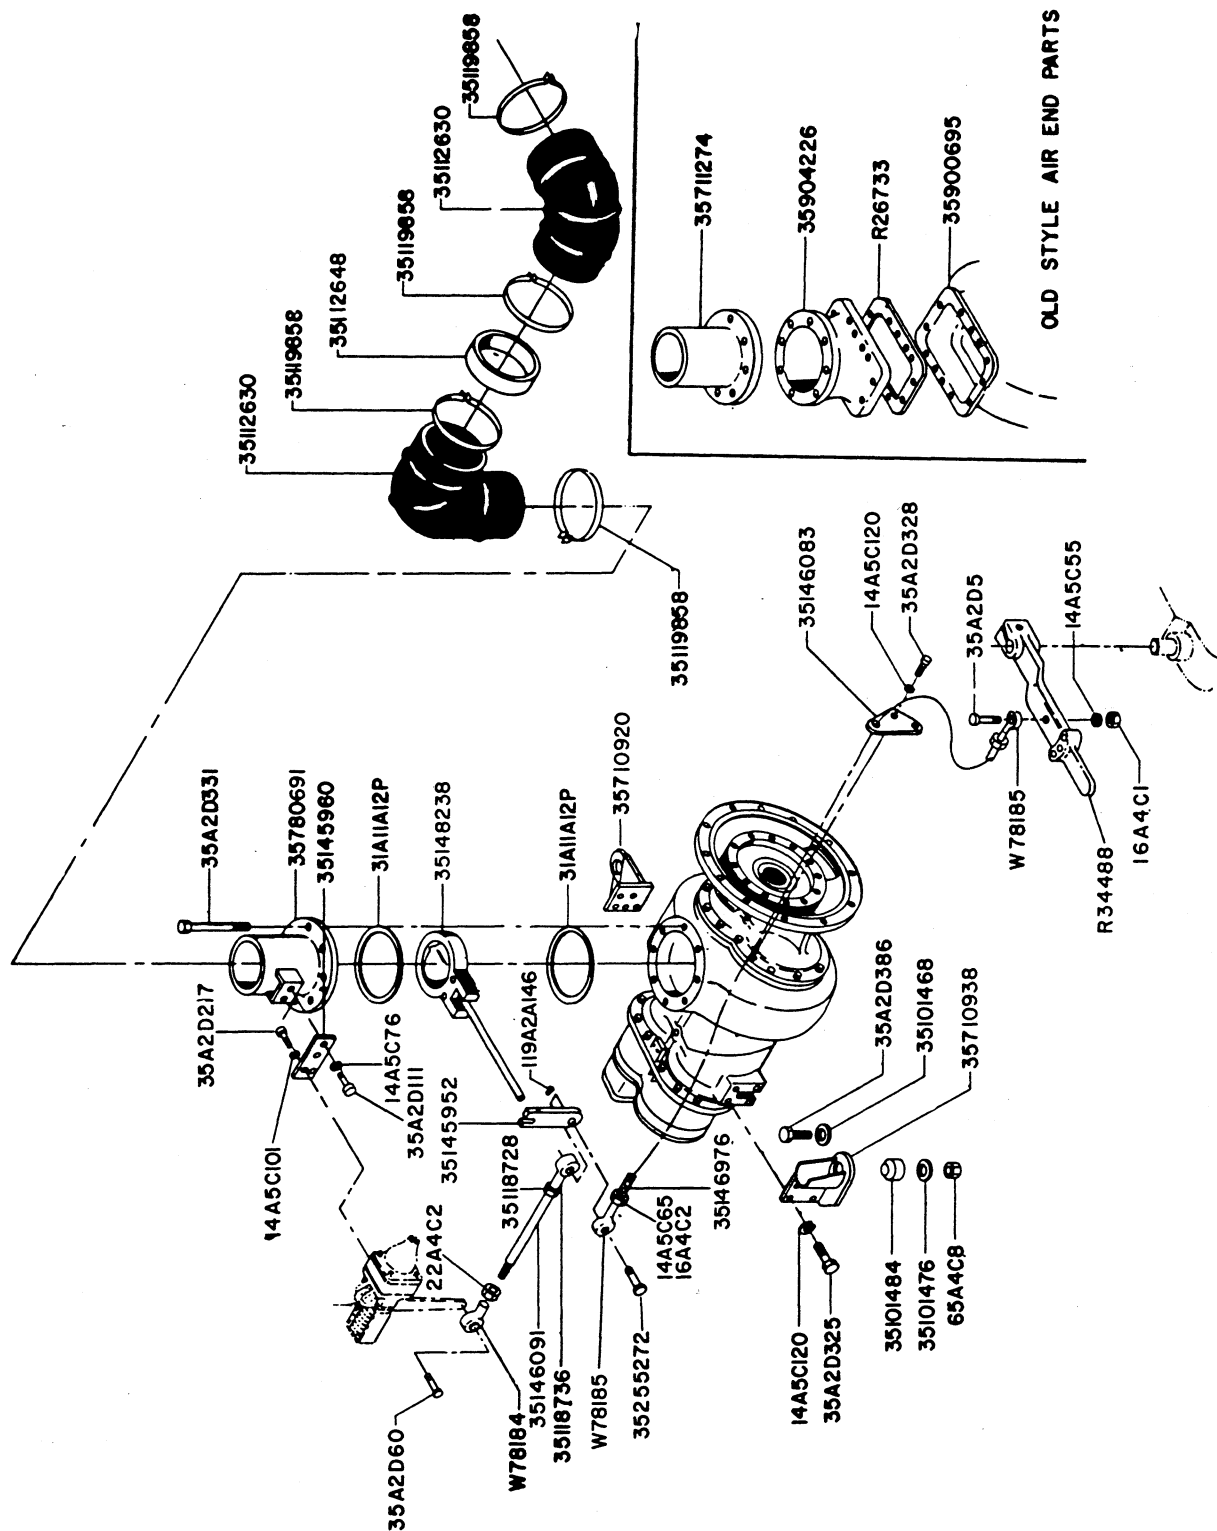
Air End Complete With Butterfly Valve and Regulator Linkage
